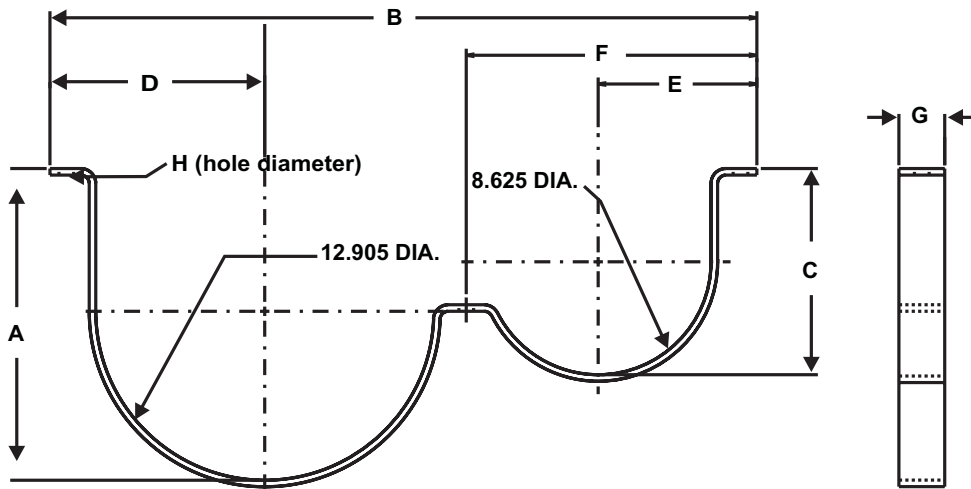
Dimensions for 225-lb. System (P/N 06-236127-001, See Table 1)
